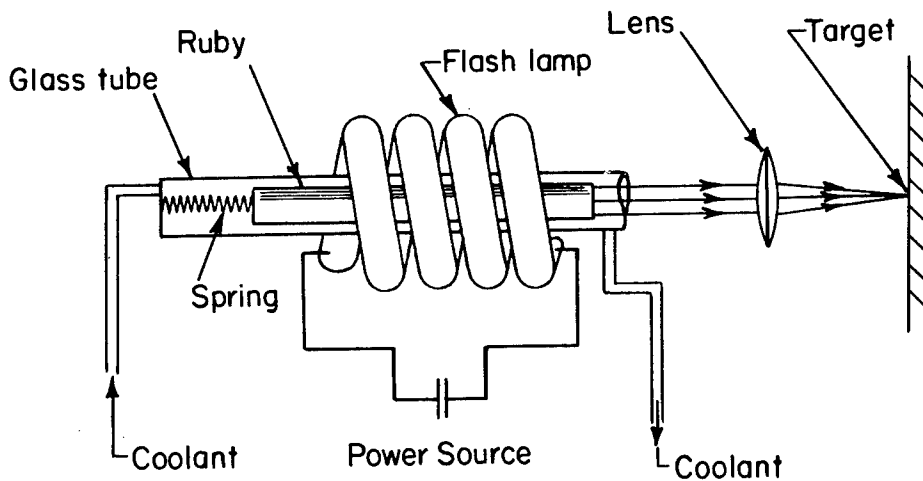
LASER WELDING EQUIPMENT
